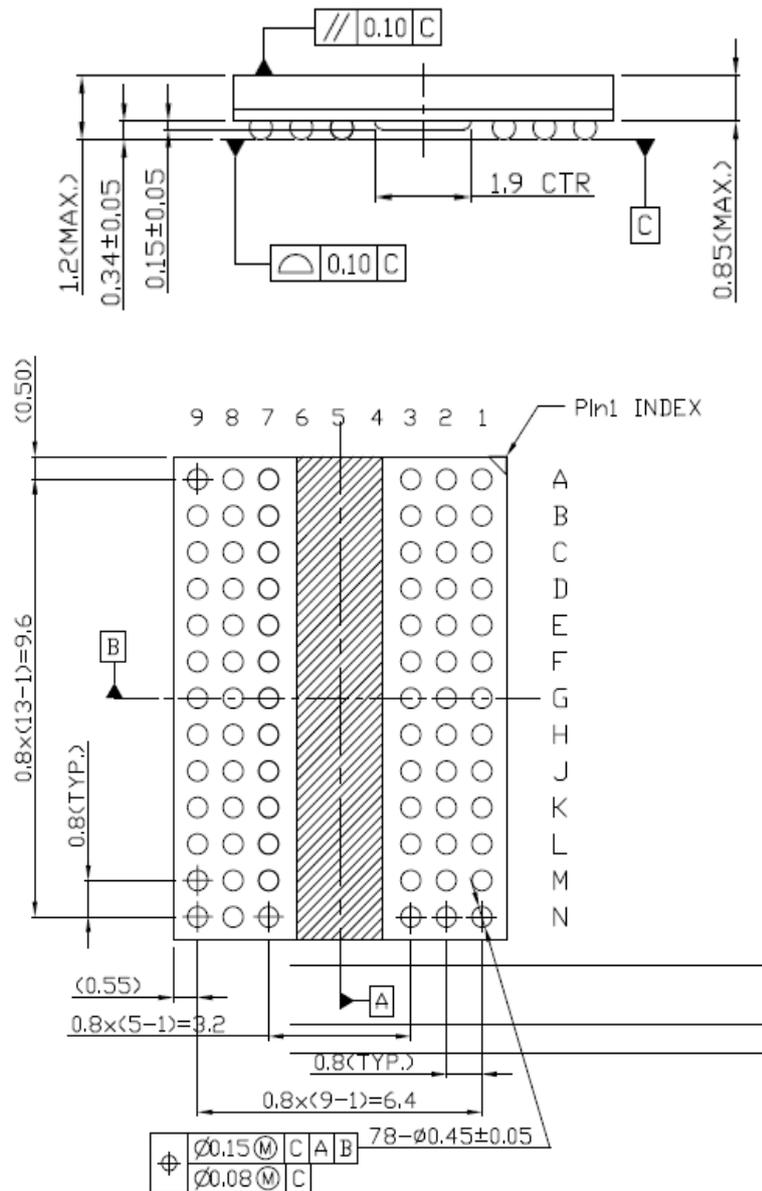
FBGA 78-ball package outline drawing (unit:mm)
